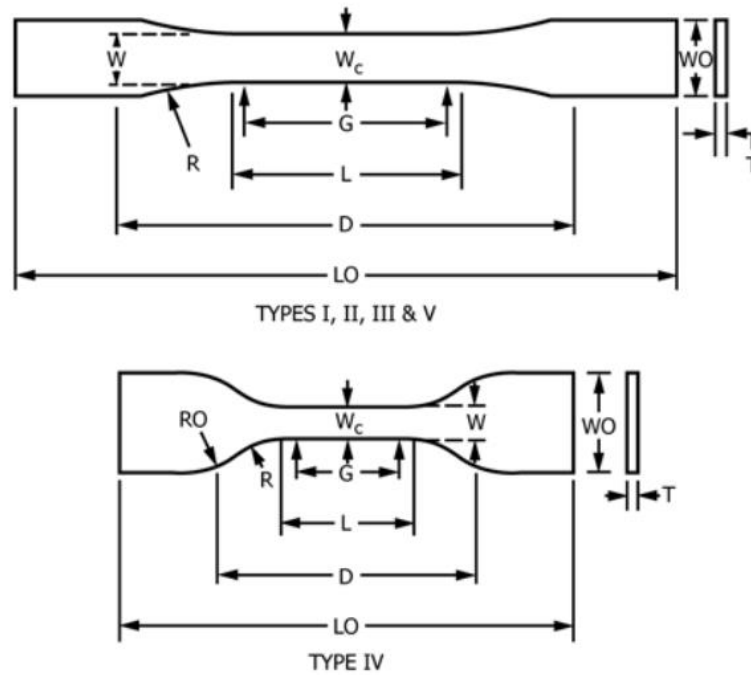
Dimensions of the types of specimen according to the standard D638 [3].
